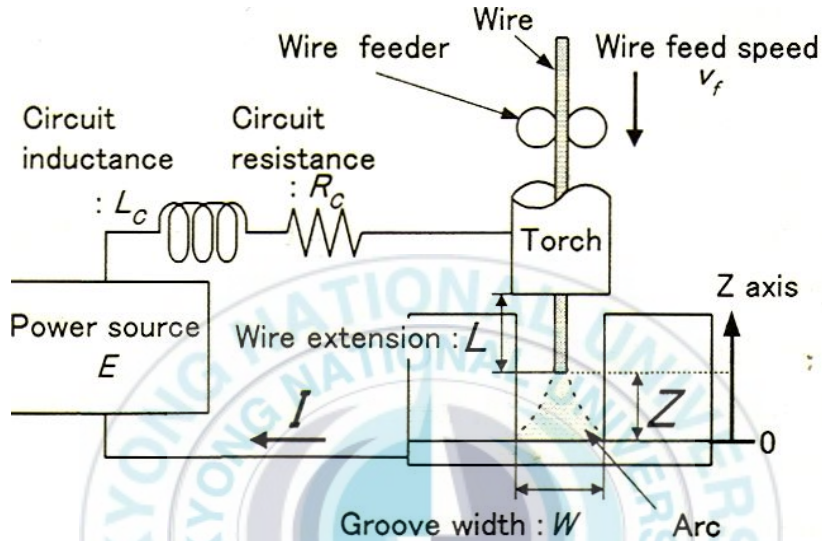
Schematic illustration of GMAW welding circuit
